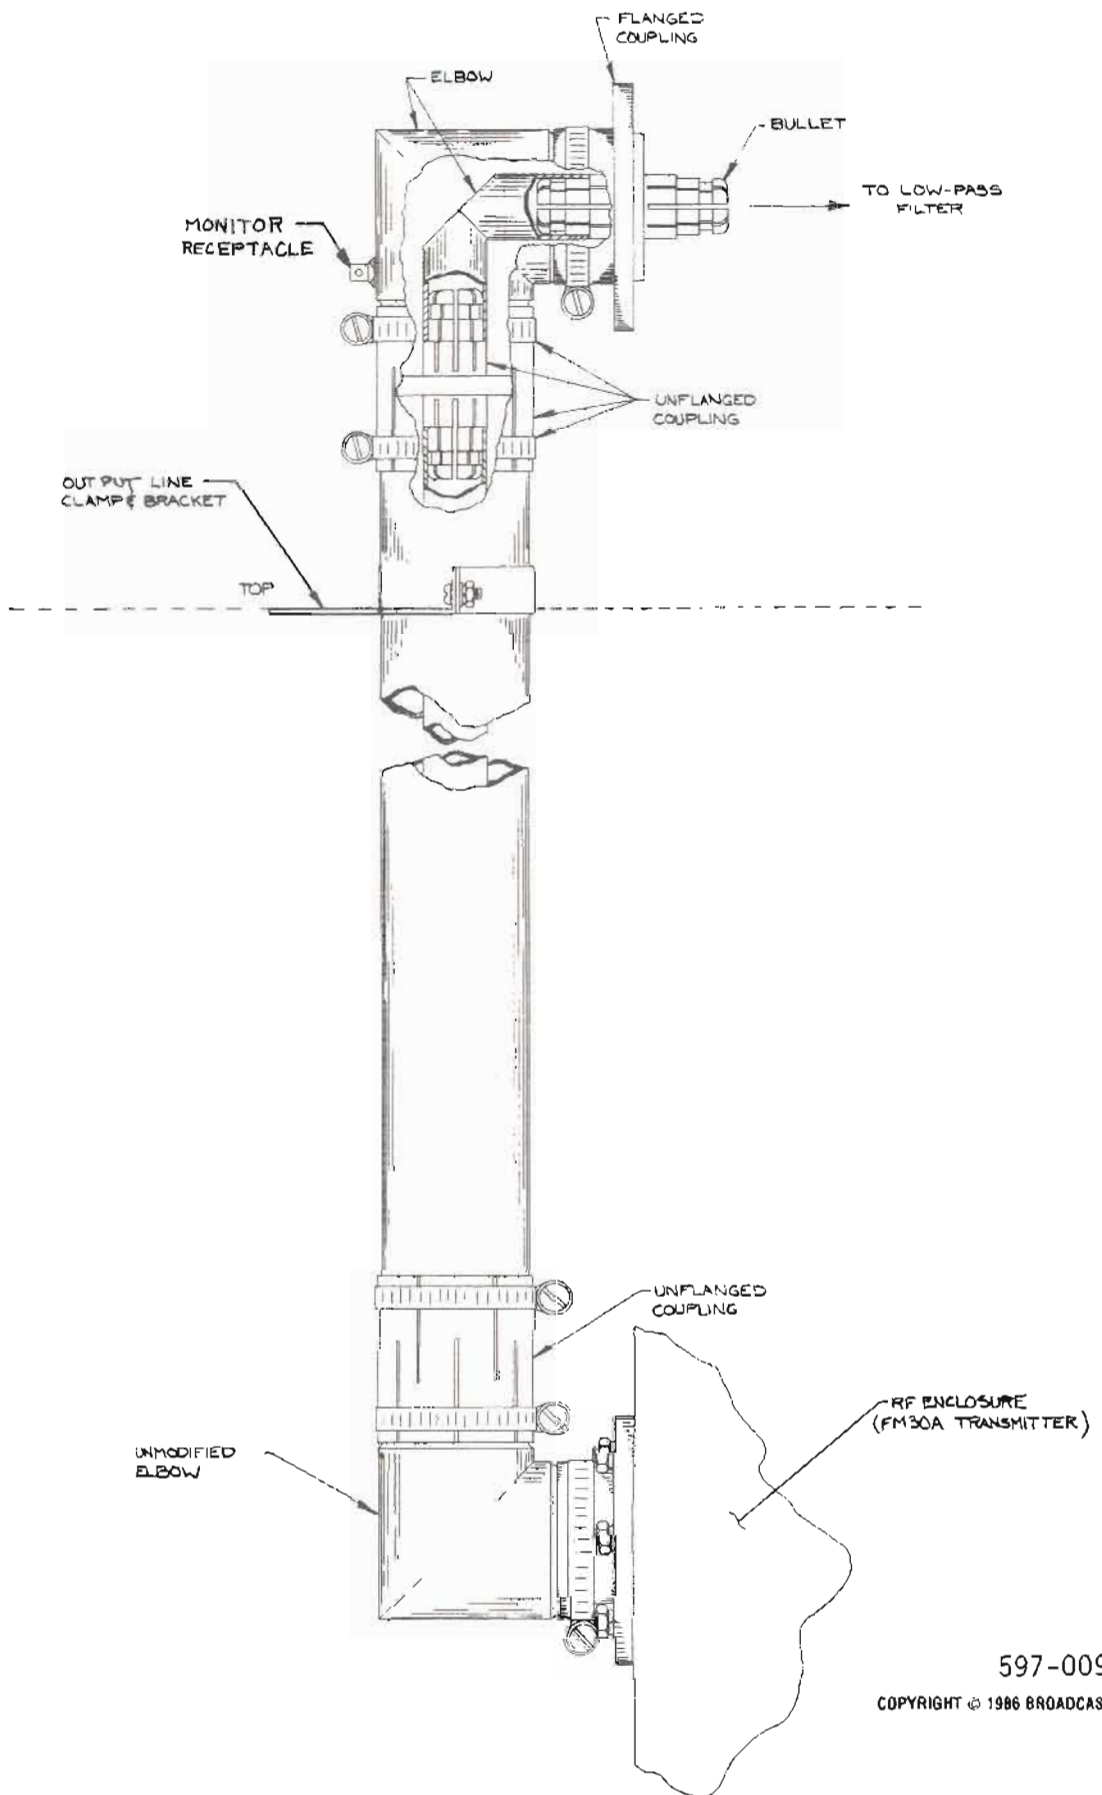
RF OUTPUT LINE ASSEMBLY, REAR VIEW
